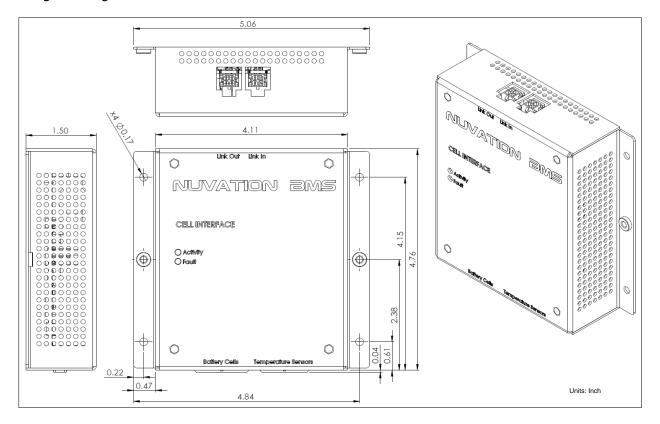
Cell Interface with Bulkhead Enclosure Mechanical Drawing
